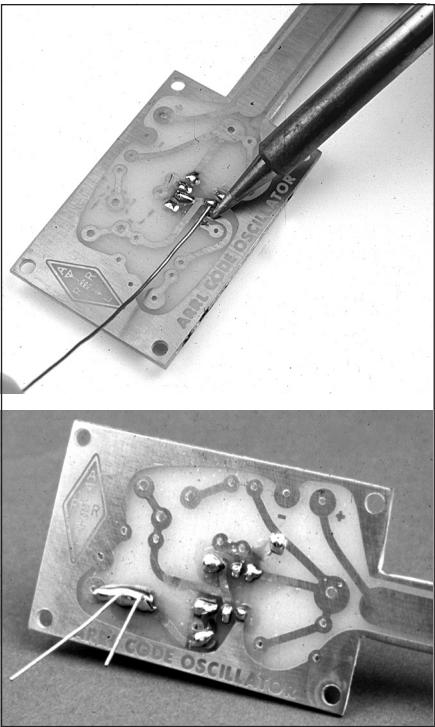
The top photo shows how to solder a component to a PC board. Make sure that the component is flush with the board on the other side. Below is a solder bridge has formed a short circuit between PC board traces.
